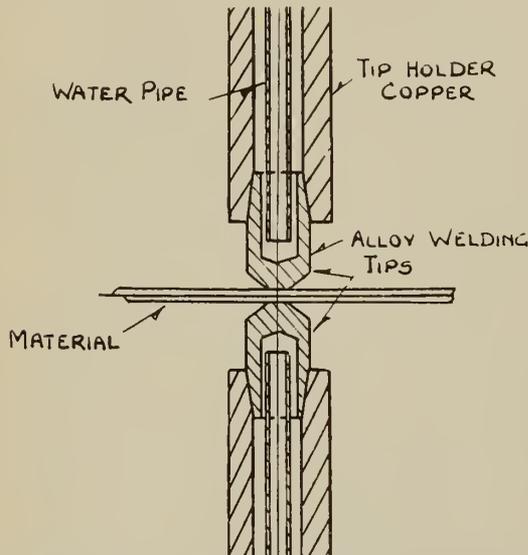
Cross-Section of Spot Welder Tips, showing Method of Cooling.
